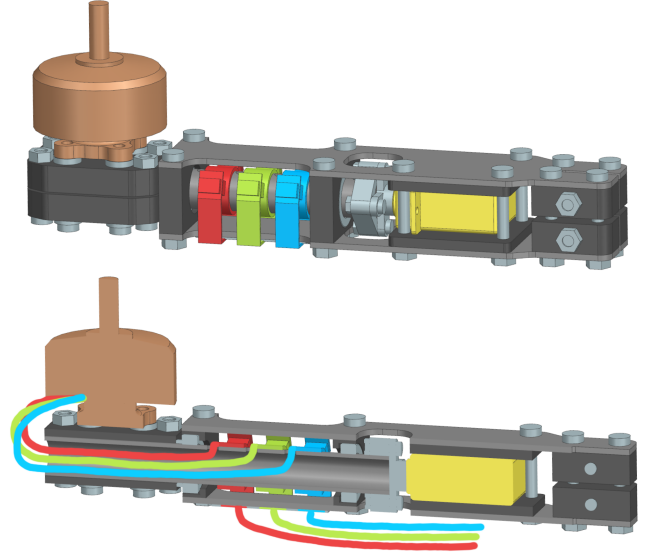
Rotating arm assembly with a section view showing internal wiring of the slip-rings
